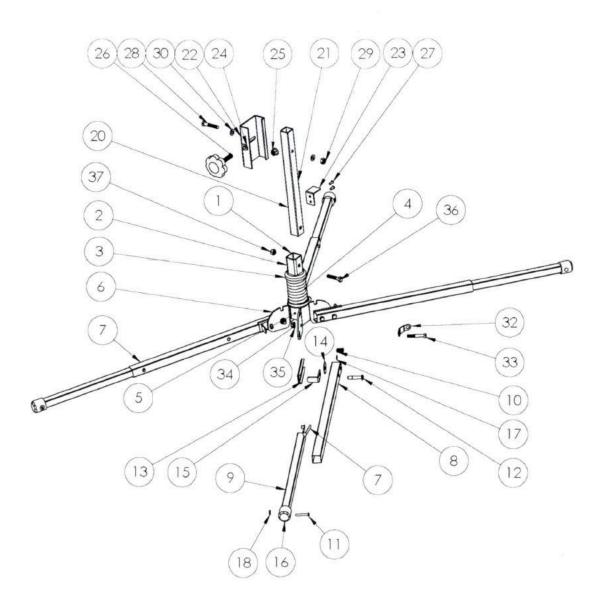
Plasticade® SS310 Technical Drawing (Sheet 1 of 3)
